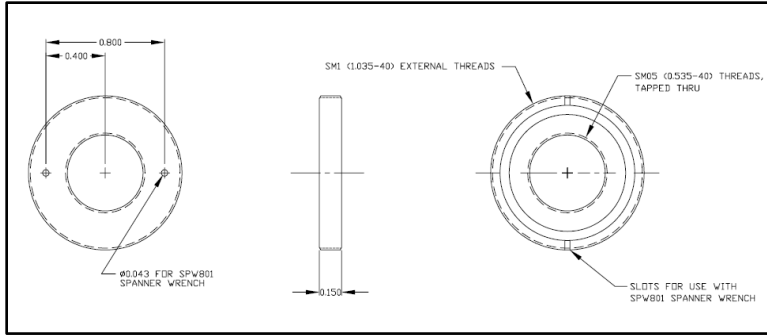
Thor Labs SM1A6- Adapter, 0.15” Thick Drawing [53]
